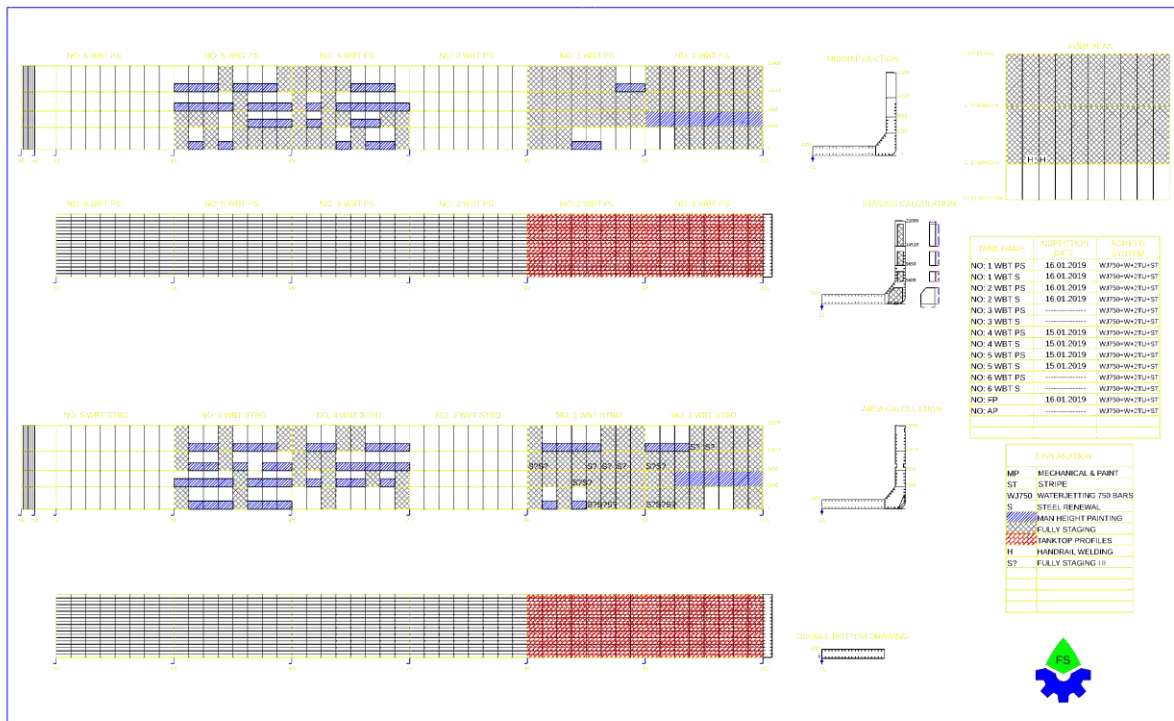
Ballast Tank Condition Inspection Sketch for Staging & Coating
